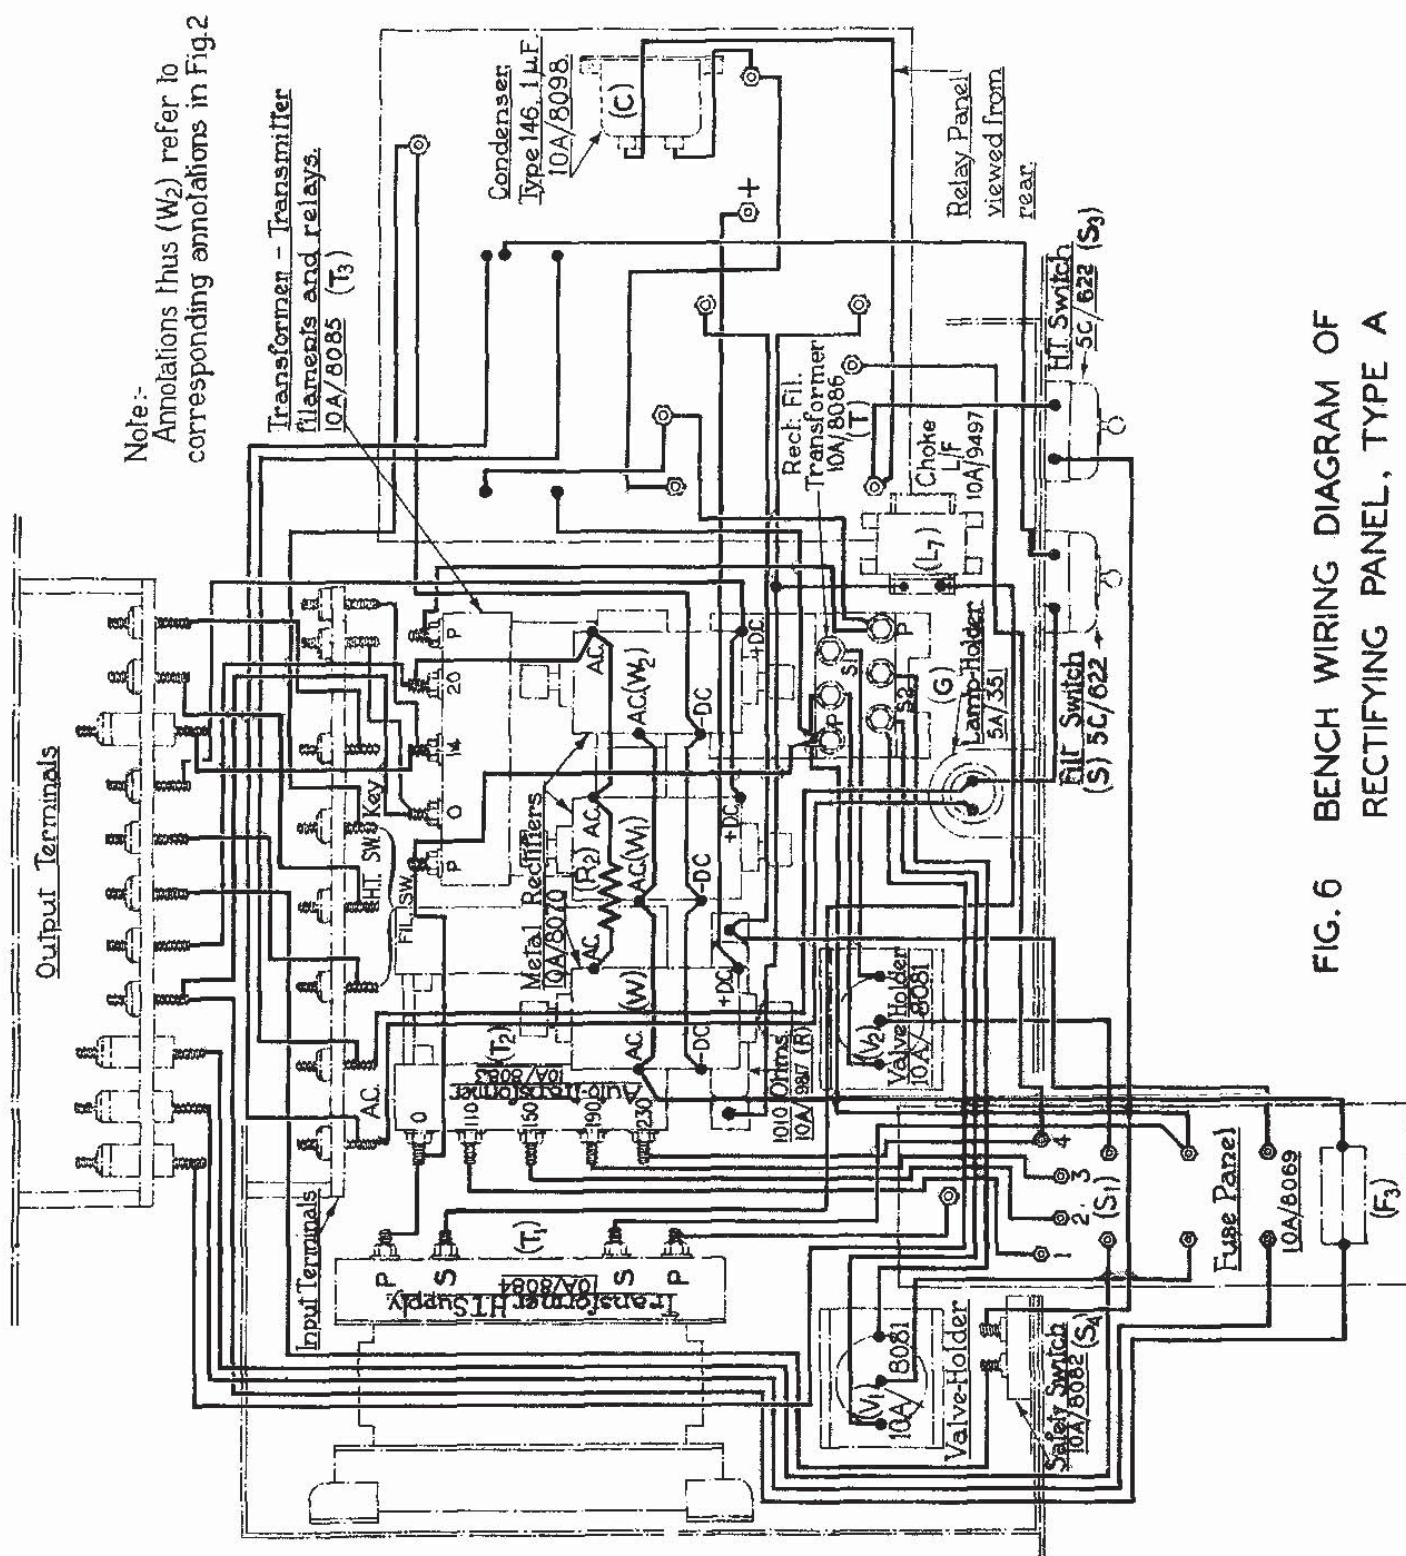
BENCH WIRING DIAGRAM OF RECTIFYING PANEL, TYPE A
